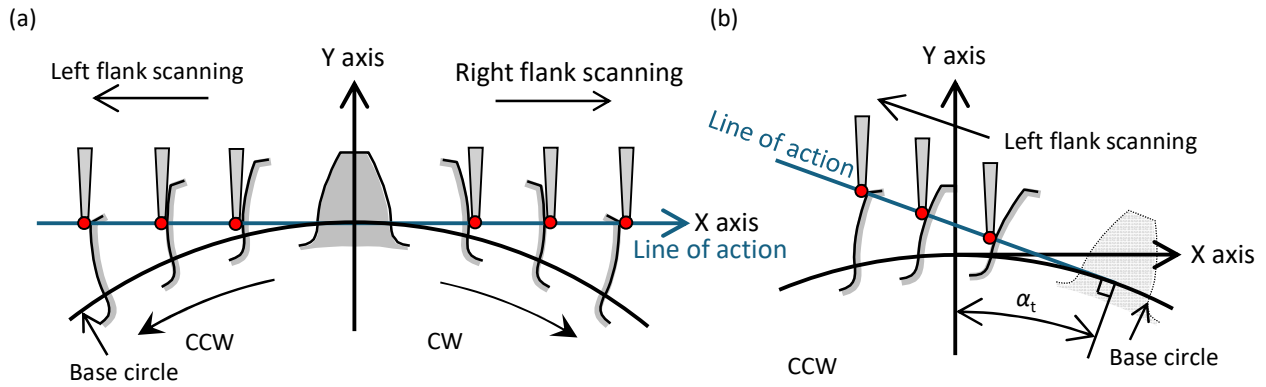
Schematic of involute gear profile measurement: (a) Traditional measurement principle, requiring a large probe travel due to different measurement regions on the left and right flanks. (b) Measurement principle based on modified line-of-action scanning for the left flank.
